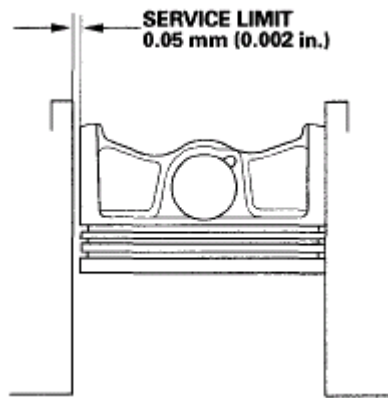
Identifying Piston-To-Cylinder Bore Clearance
